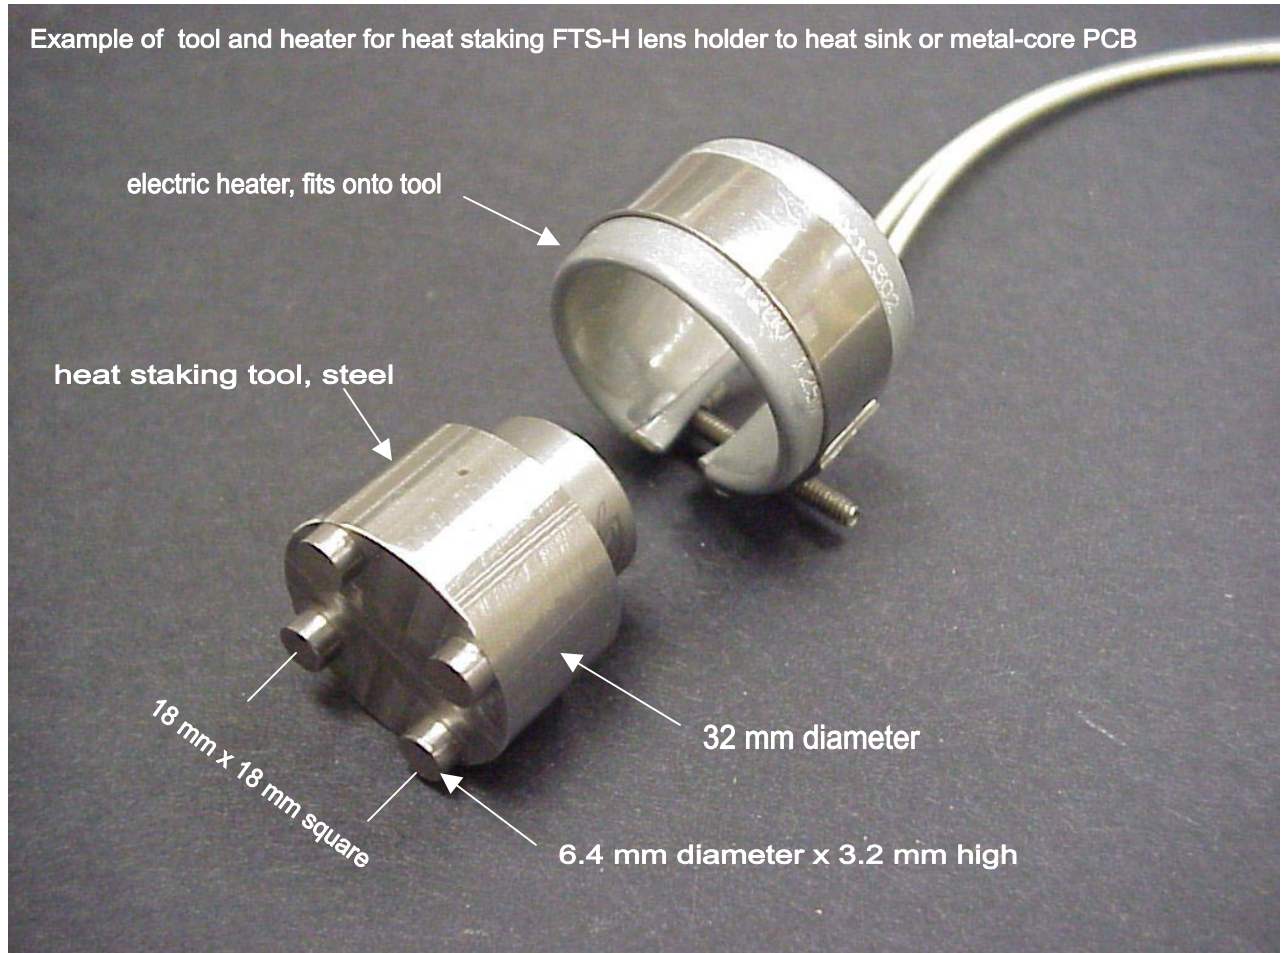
Example of tool and heater band for heat staking FTS-H lens holder to heat sink or metal core PCB
